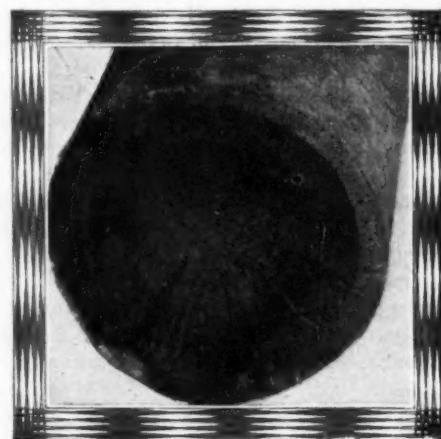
Example of forging showing how the hammer produces a hard shell just as in carbonizing
